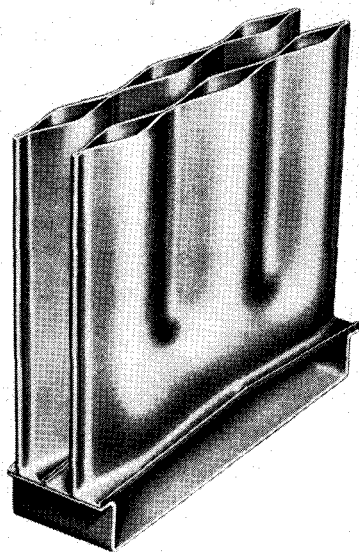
Radiator Section Showing Joints Formed With Outside Welds
